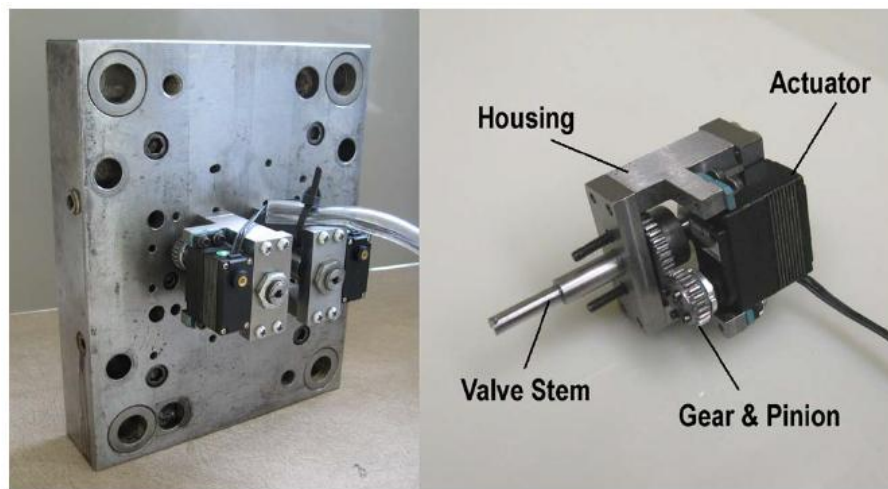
A prototype of compact melt modulation valve driving unit [2]
